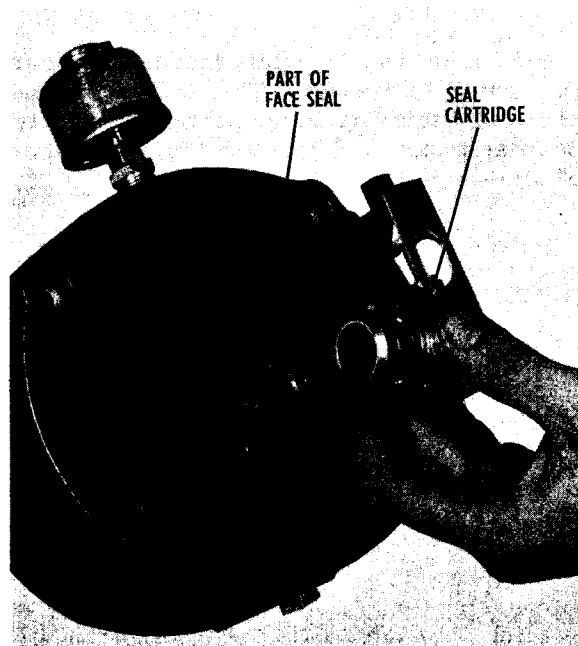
SEAL CARTRIDGE AND METAL FACE SEAL PARTIALLY REMOVED
